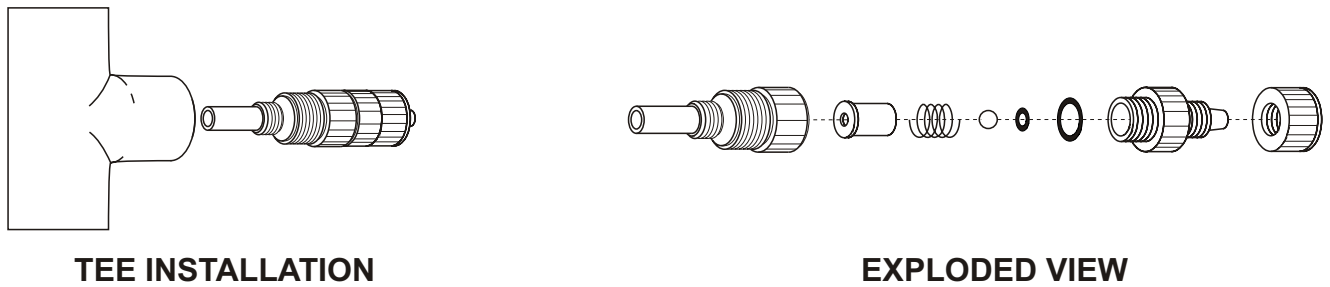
TEE INSTALLATION AND EXPLODED VIEW
